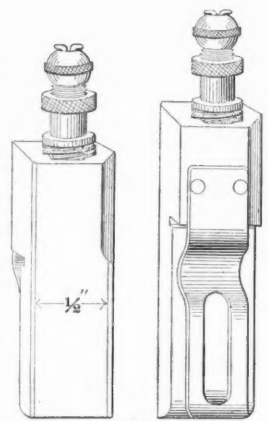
Mechanism Operating Chuck of Cahill Lathe.
